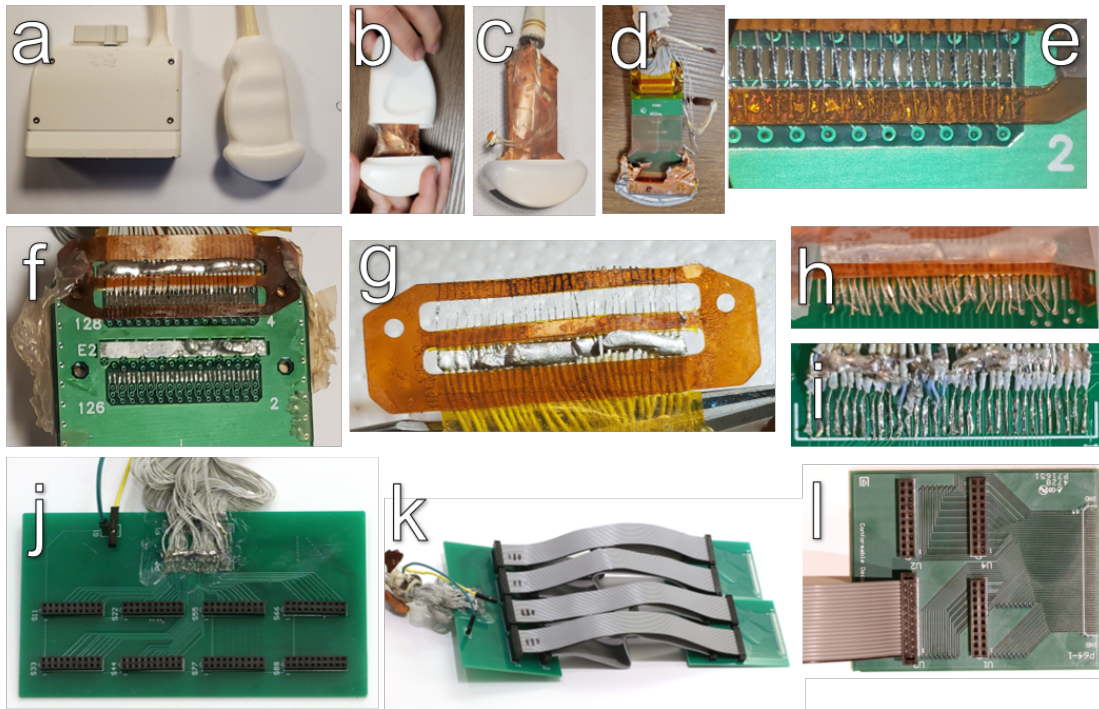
(a-g) Disassembly of a commercial ultrasound probe with a UTA connection. (h-i) Removal of wires from commercial PCB onto custom PCB. (j) completed UTA connector PCB 2. (k-i) PCB 2 interfaced with two PCB 1 transducer interfaces.
